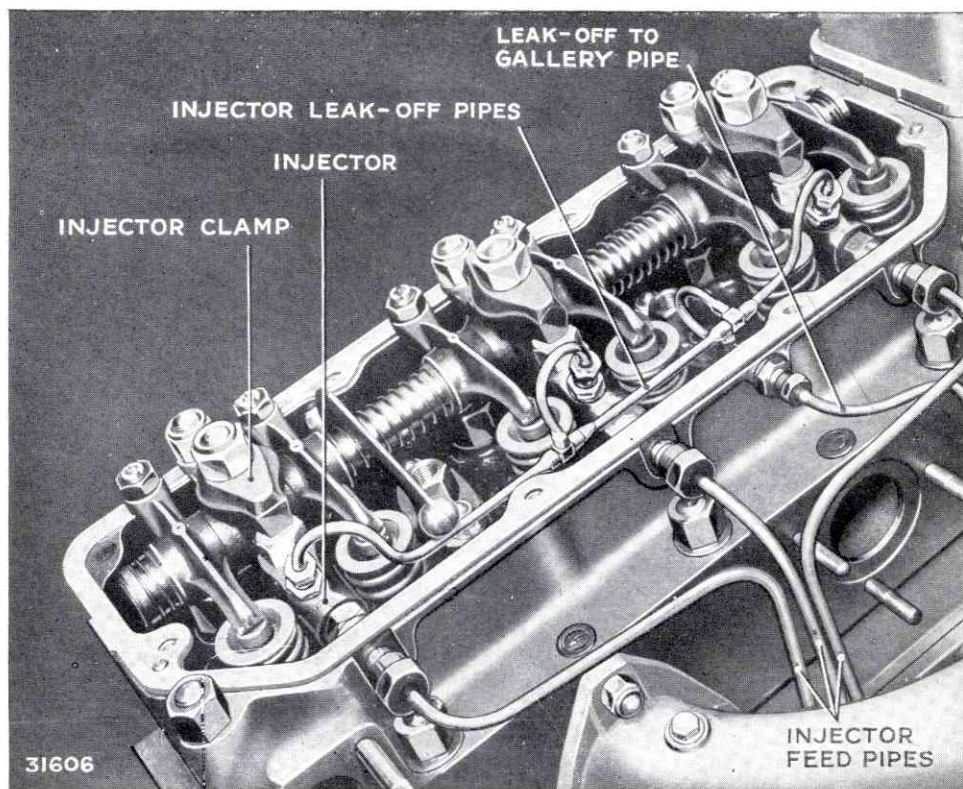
INJECTORS AND LEAK-OFF PIPES IN POSITION IN CYLINDER HEAD
